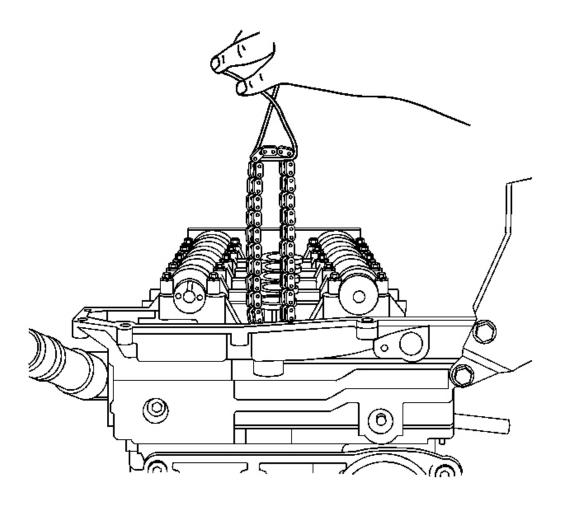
Attaching Wire To Timing Chain Courtesy of GENERAL MOTORS CORP.
